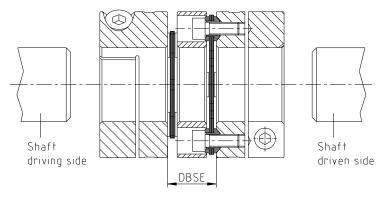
Assembly of RADEX[®]-NC HT (taper type of sleeve)
